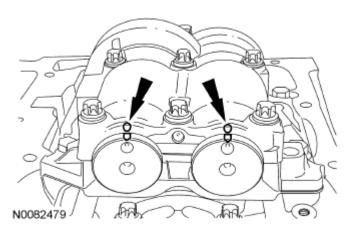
Locating Balancer Unit Shaft Marks At TDC Position Courtesy of FORD MOTOR CO.
